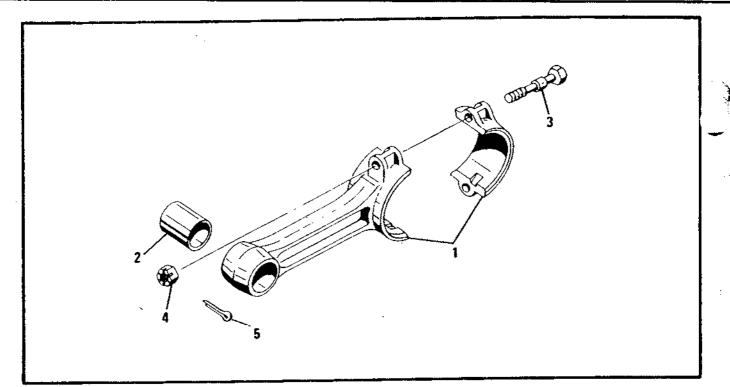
CONNECTING ROD ASSEMBLY ALL MODELS
